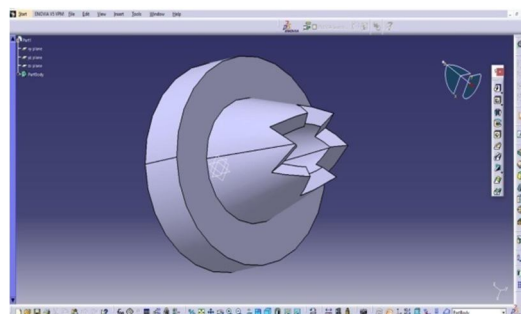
A: Chevron Nozzle With V-Shaped Serration
